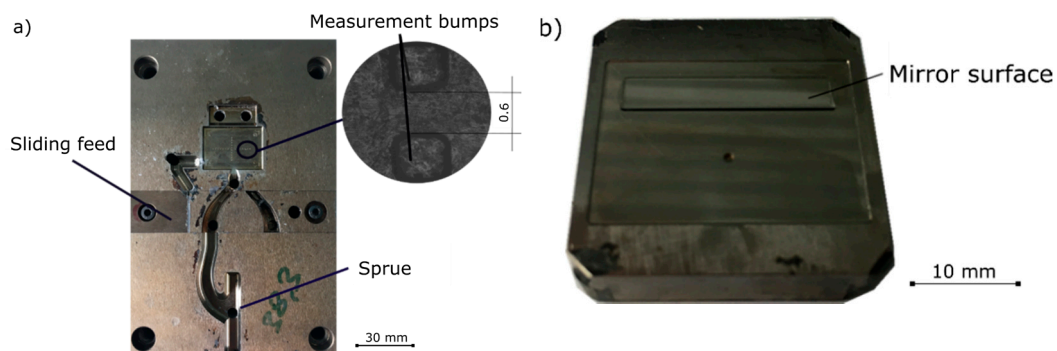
(a) measurement side of the cavity. Bumps for dimensional analysis were milled using precision machining. (b) mirror side of the cavity. The reflective surface was milled in NiP coating using ultra-precision machining employing diamond mill bits.
